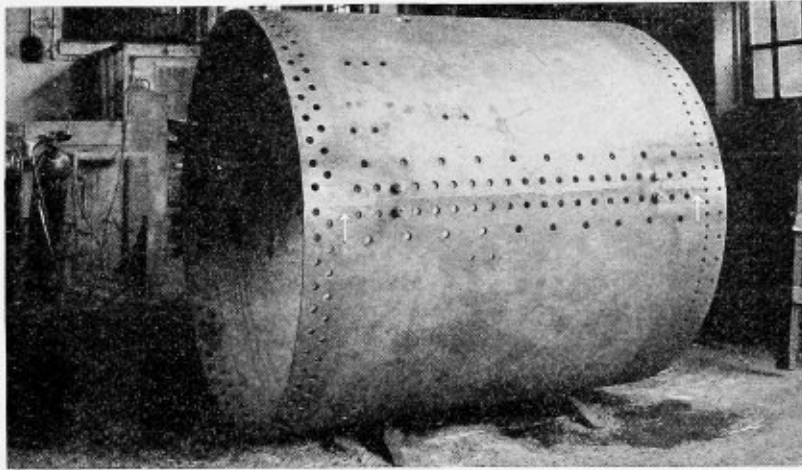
Welded Section of Locomotive Boiler
